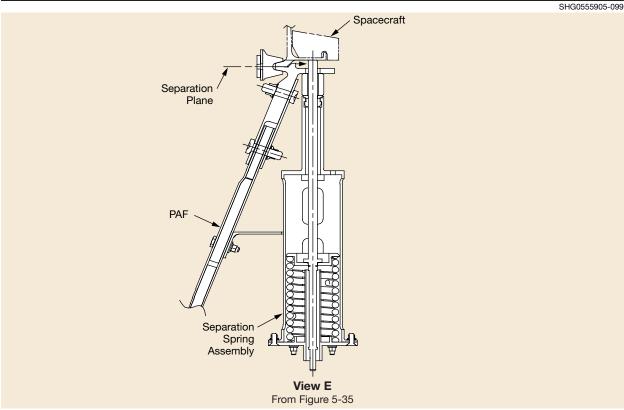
1666-4 PAF Separation Spring Assembly
